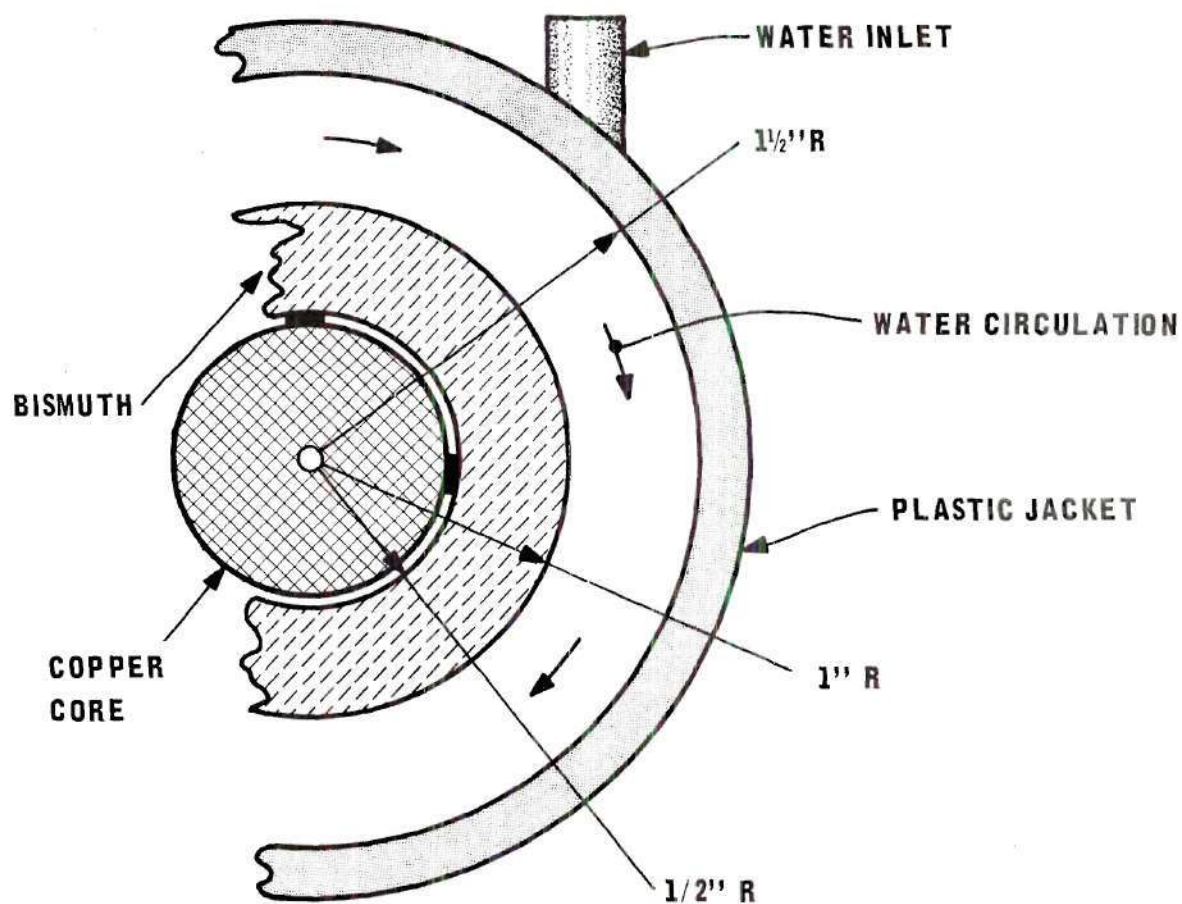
Cross-sectional View of Test Specimen and Water Jacket
